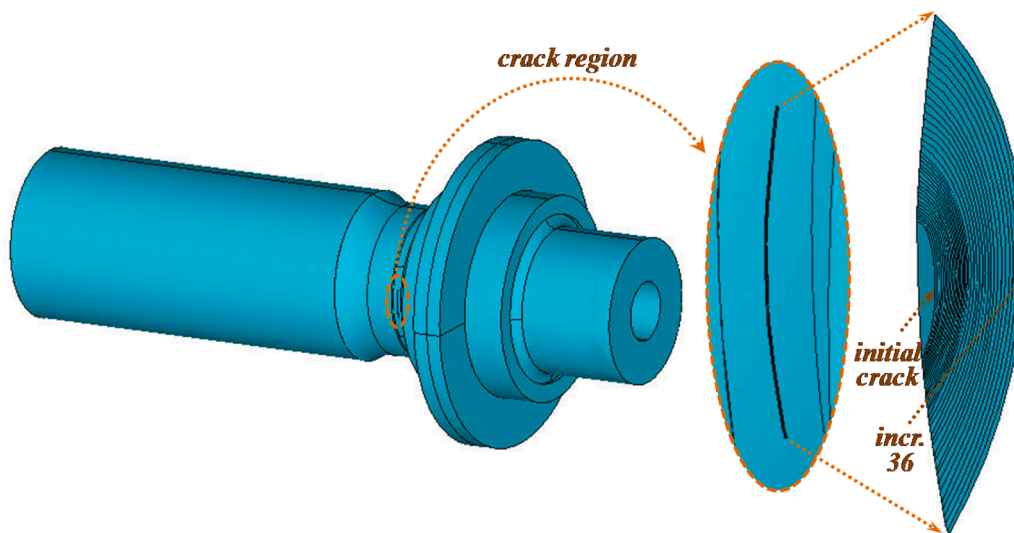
Close-up view of the cracked region and evolving crack surfaces.
